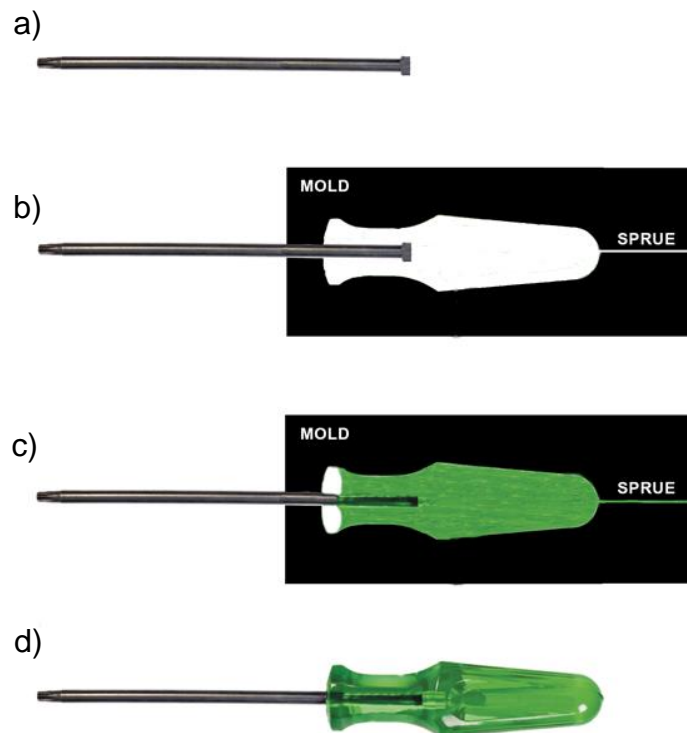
Illustration of the metallic insert molding process: metallic part (a), metallic part placed into injection mold (b), the mold is filled with molten polymer (c) and after the cooling the product is obtained (d). [Personal archive]
